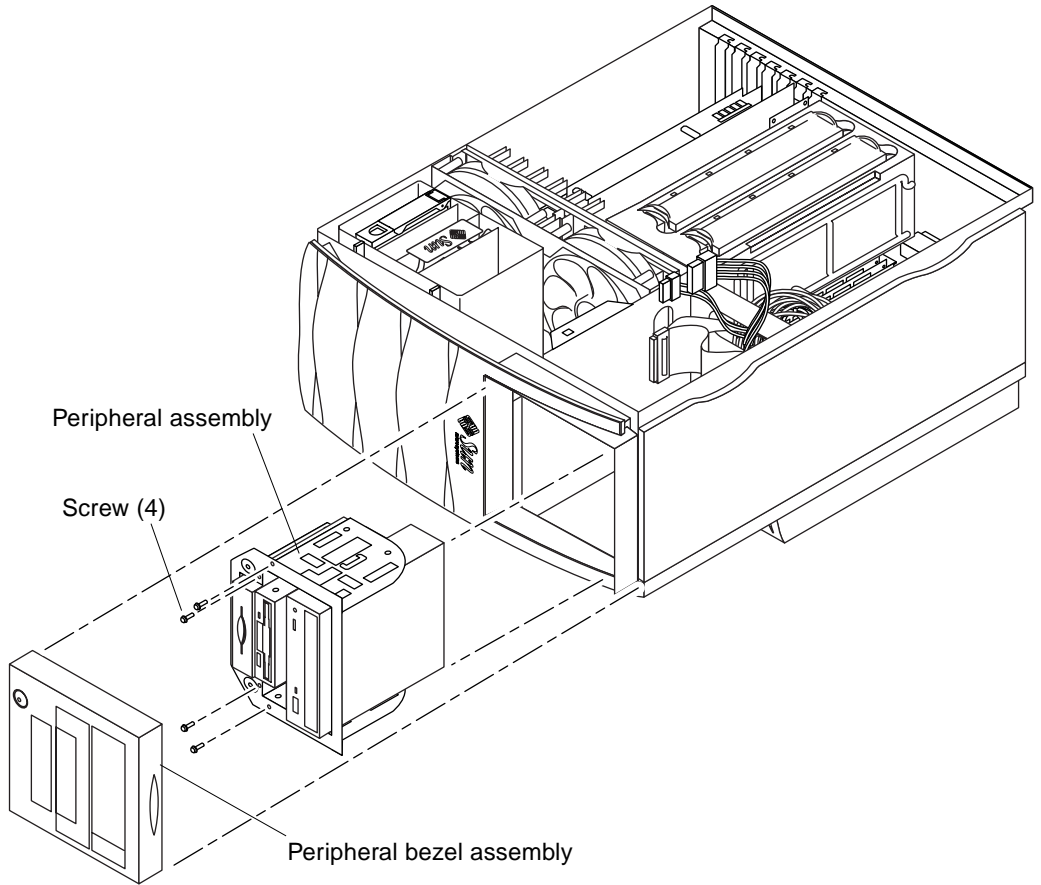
Removing and Replacing the Peripheral Assembly
